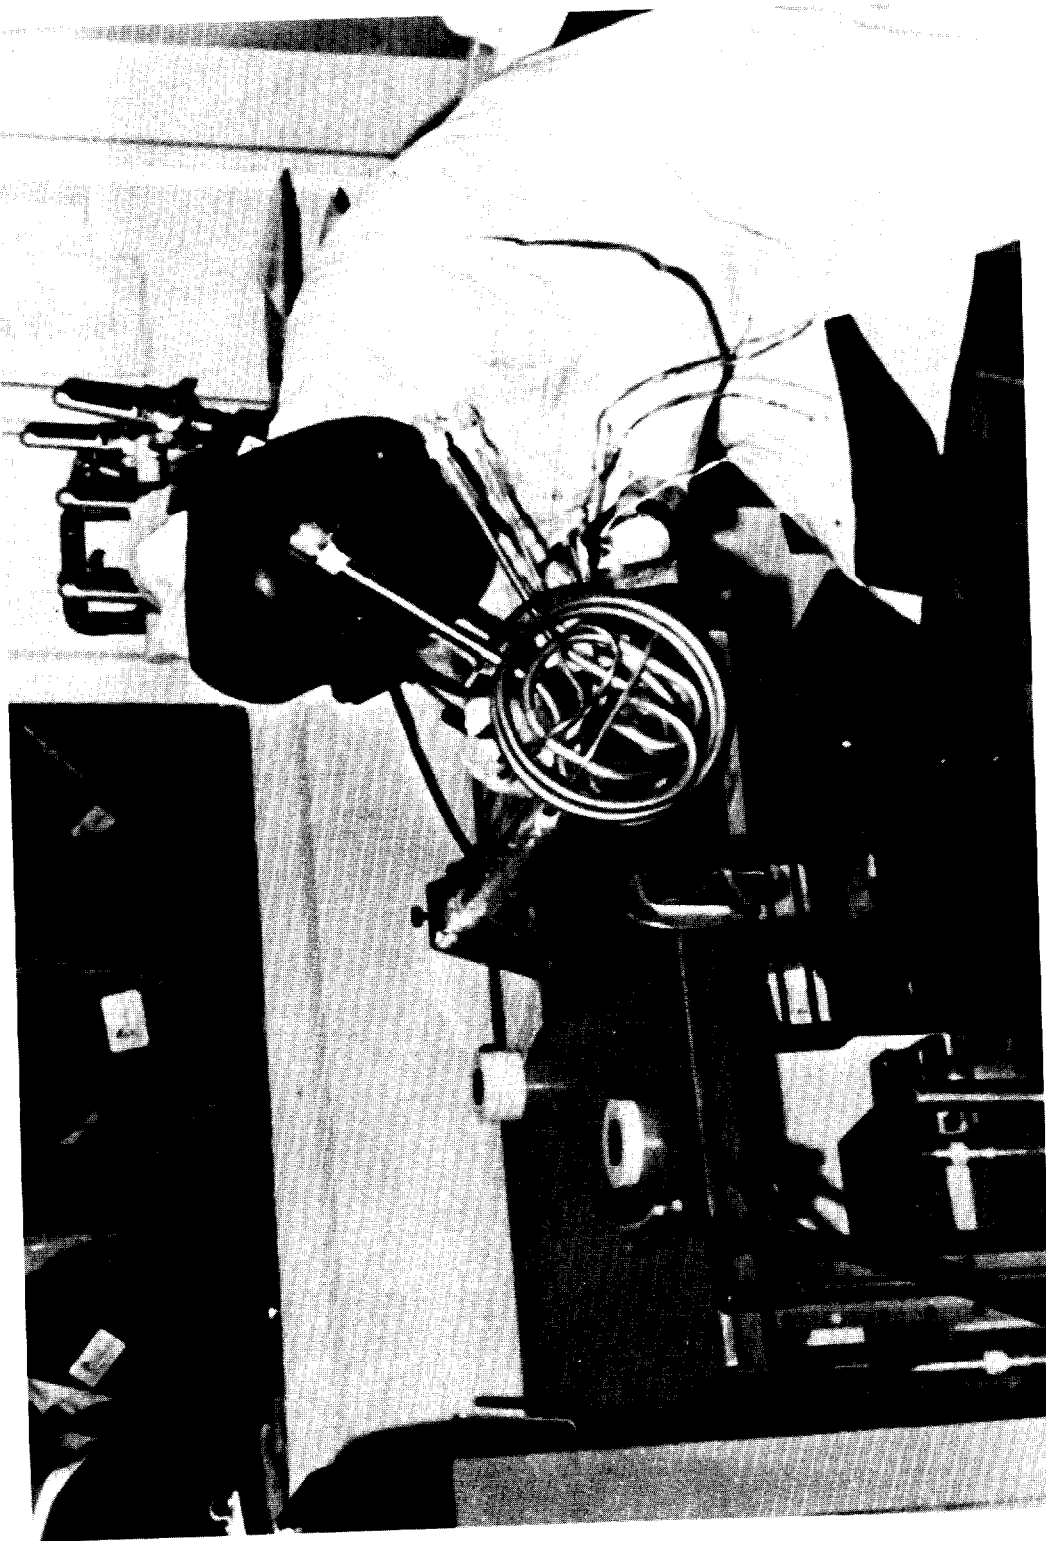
Welding the quantity probe to coil assembly.
